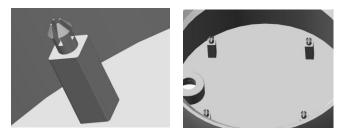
Picture of guide pin using snap-on head for electronic circuit attachment.
